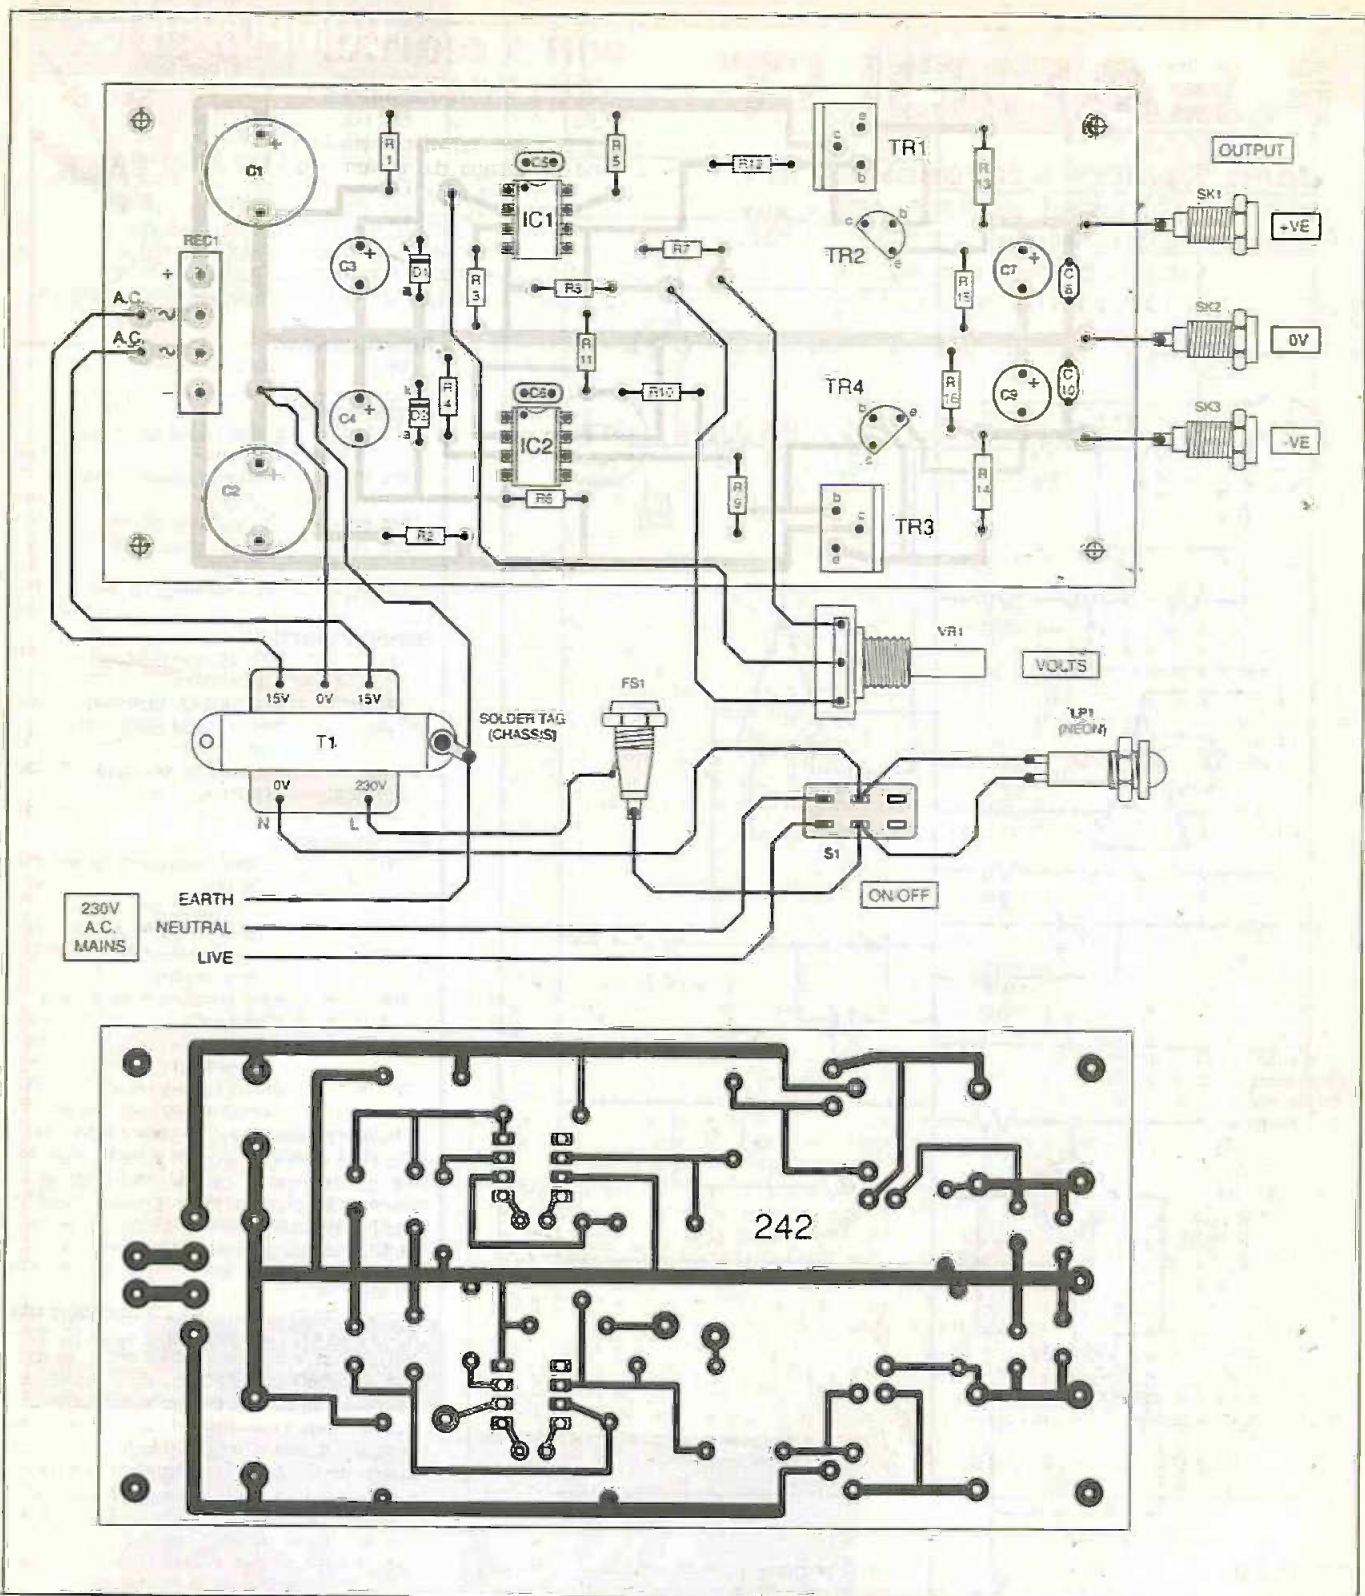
Component layout and full size copper foil master track pattern, plus off-board connection details.
